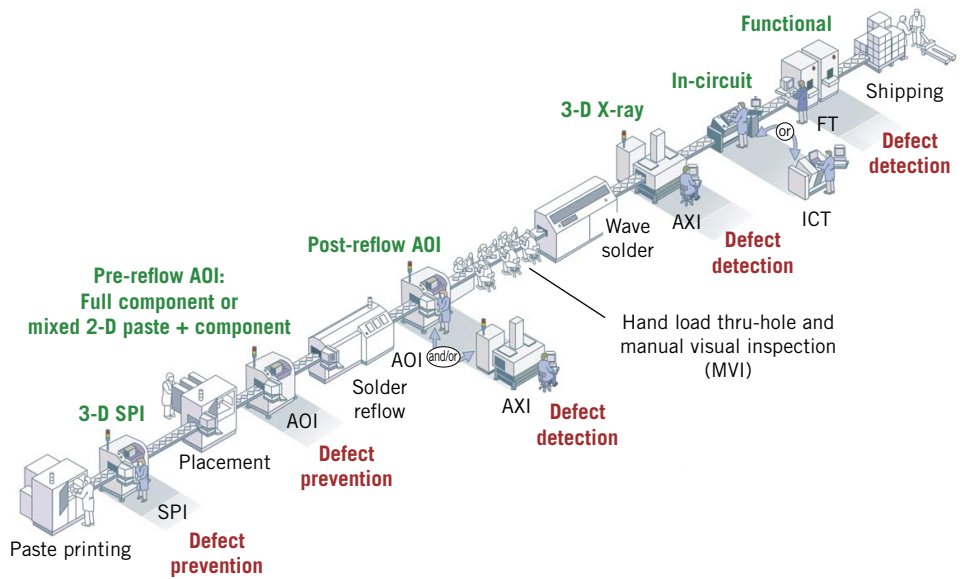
Developing an inspection and test strategy: Combining inspection and testing improves shipped quality by improving the SMT process through the use of a defect-prevention strategy.
